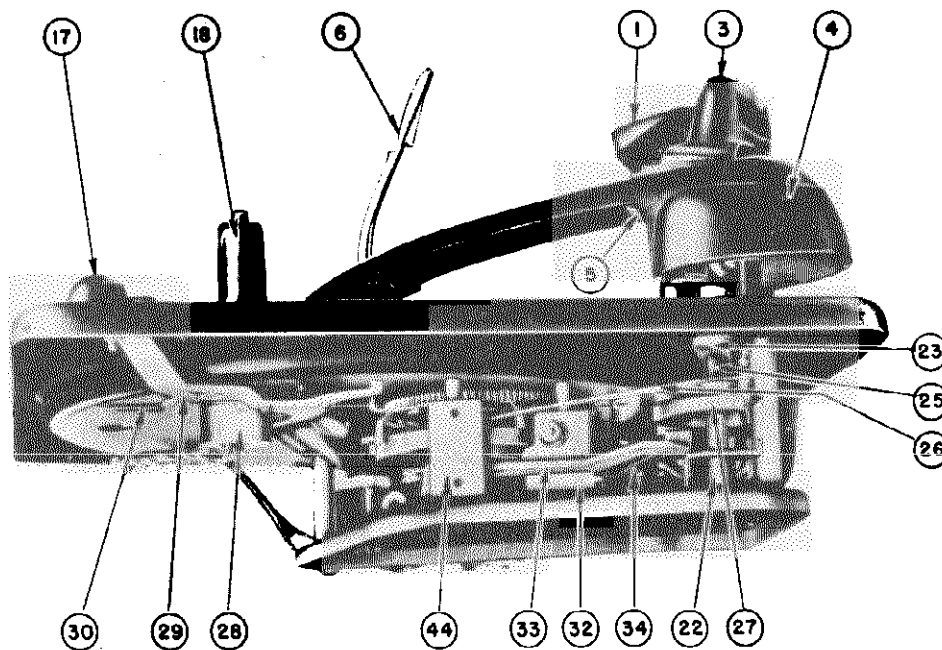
PARTS LOCATION -- RIGHT SIDE VIEW
